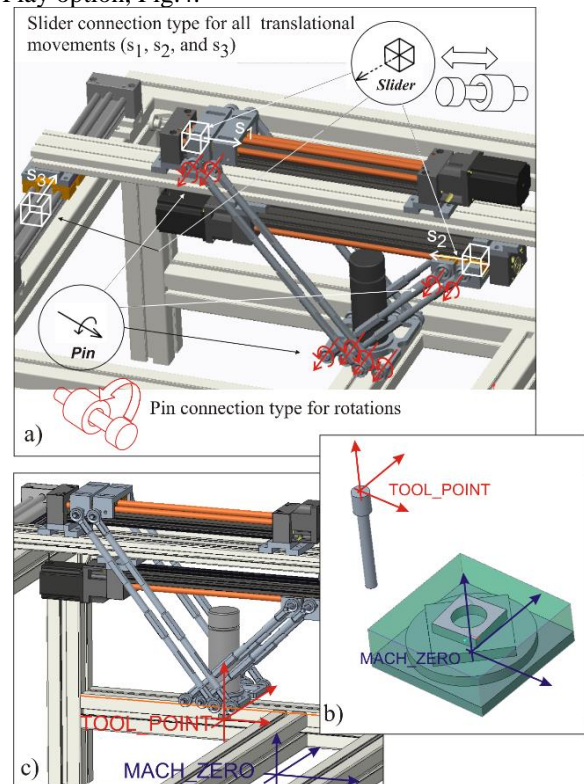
Virtual machine tool of 3-axis hybrid kinematics CNC machine with defined kinematic links and
